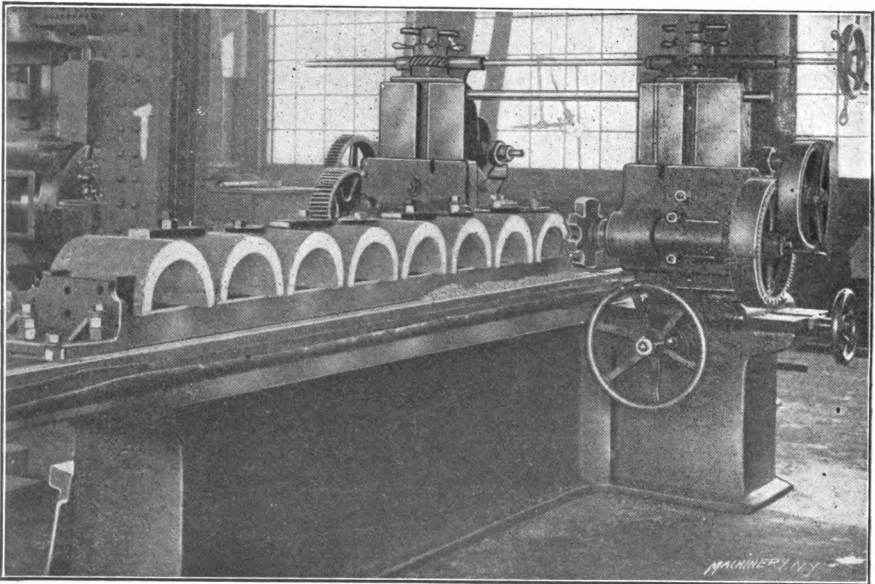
Finishing the Ends of a Gang of Crown Braces in a Double-spindle Milling Machine
